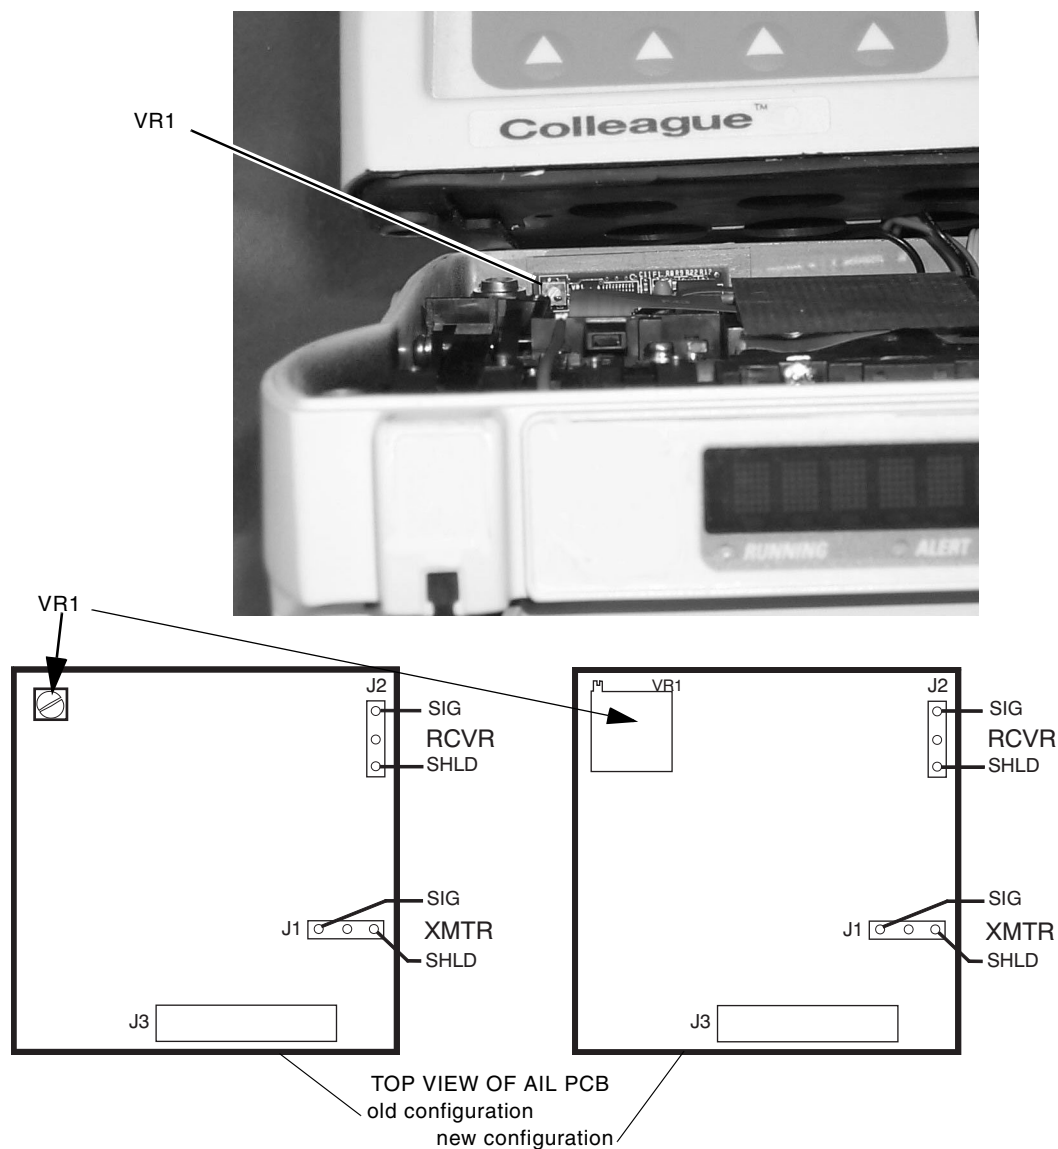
Location of Potentiometer VR1 on AIL PCB
